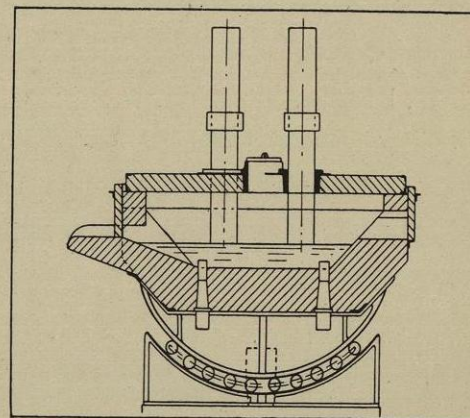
Sectional Elevation of latest 8-ton Girod Furnace.
